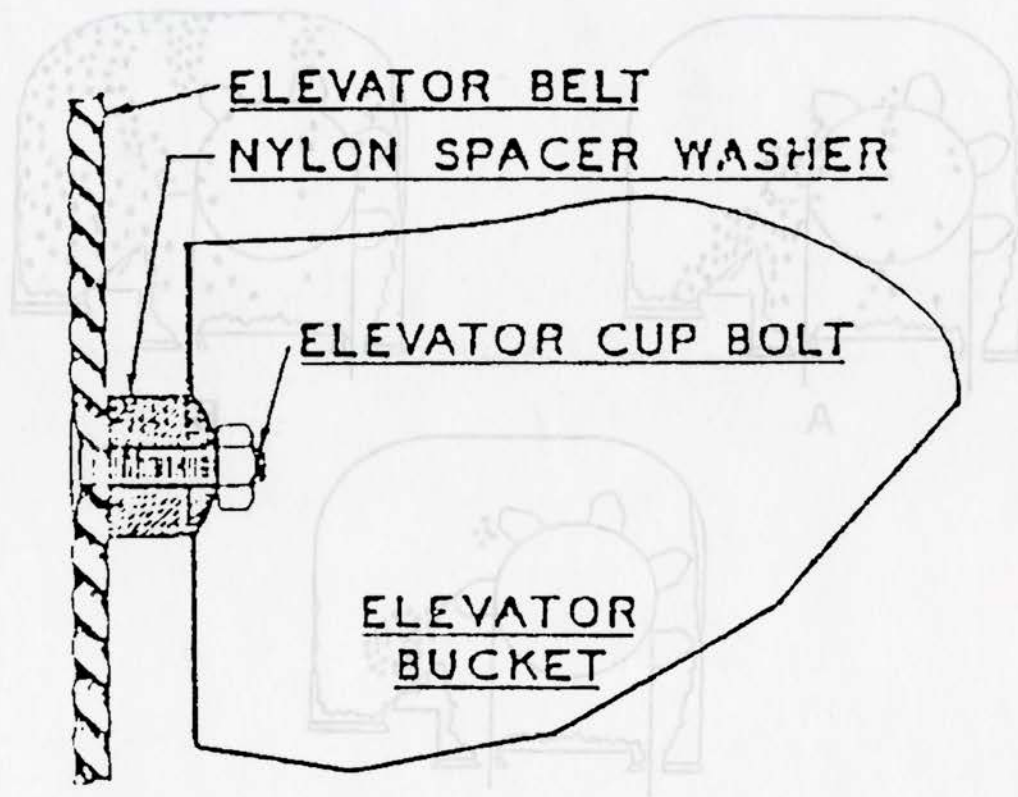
Spacer washer placed between belt and bucket to prevent mixtures.
